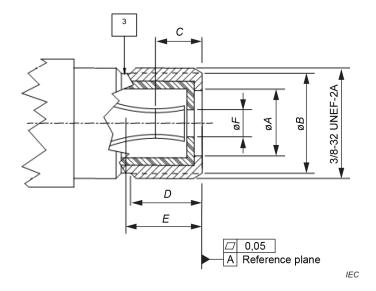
Connector "F" type female socket (indoor) (for dimensions, see Table 1)
